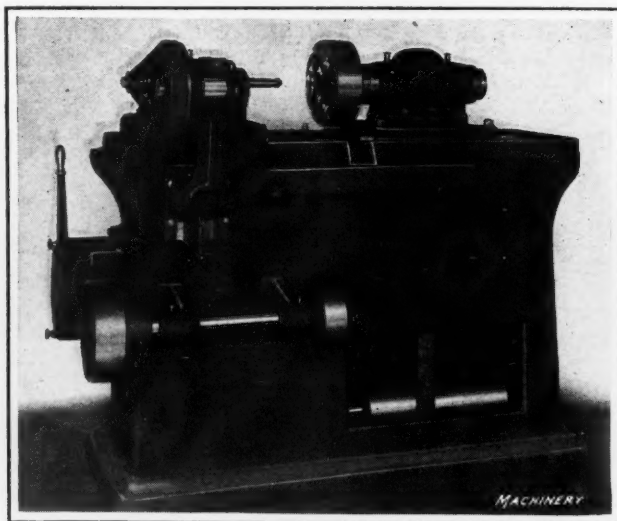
Rear View of Worcester Internal Grinding Machine shown in Fig. 1
